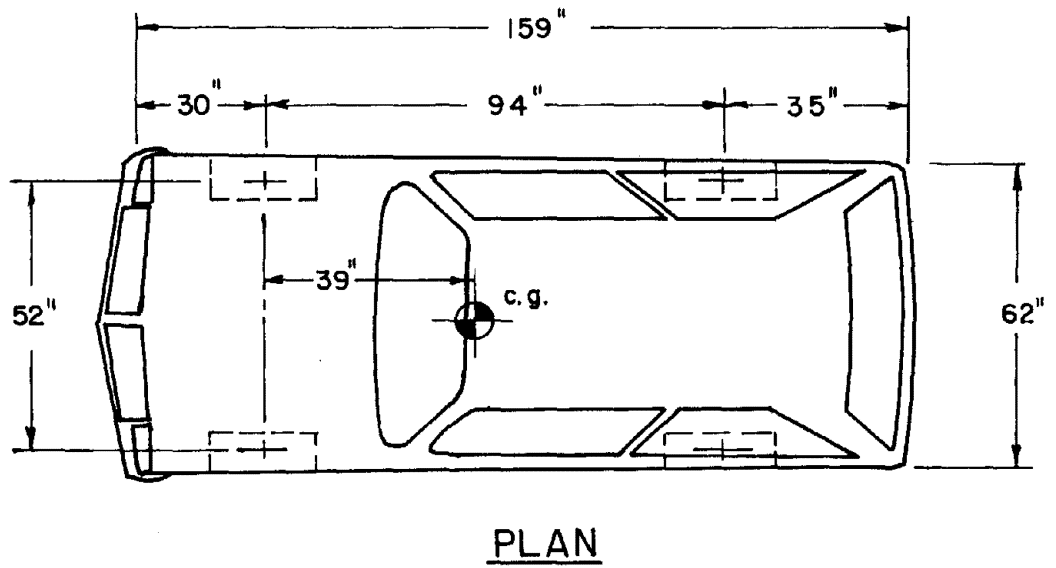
Typical dimensions of 1976 Chevrolet Chevette.
